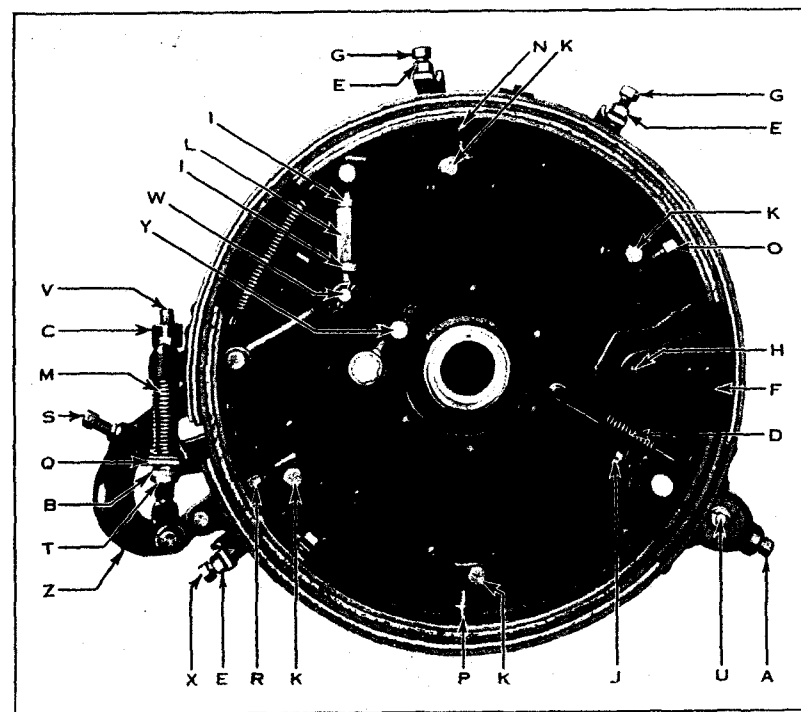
Rear Wheel Brakes (Wheel Removed)
